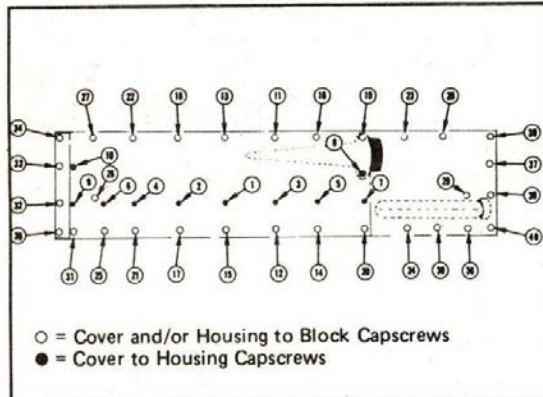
Lubricating oil cooler and the housing torquing sequence
